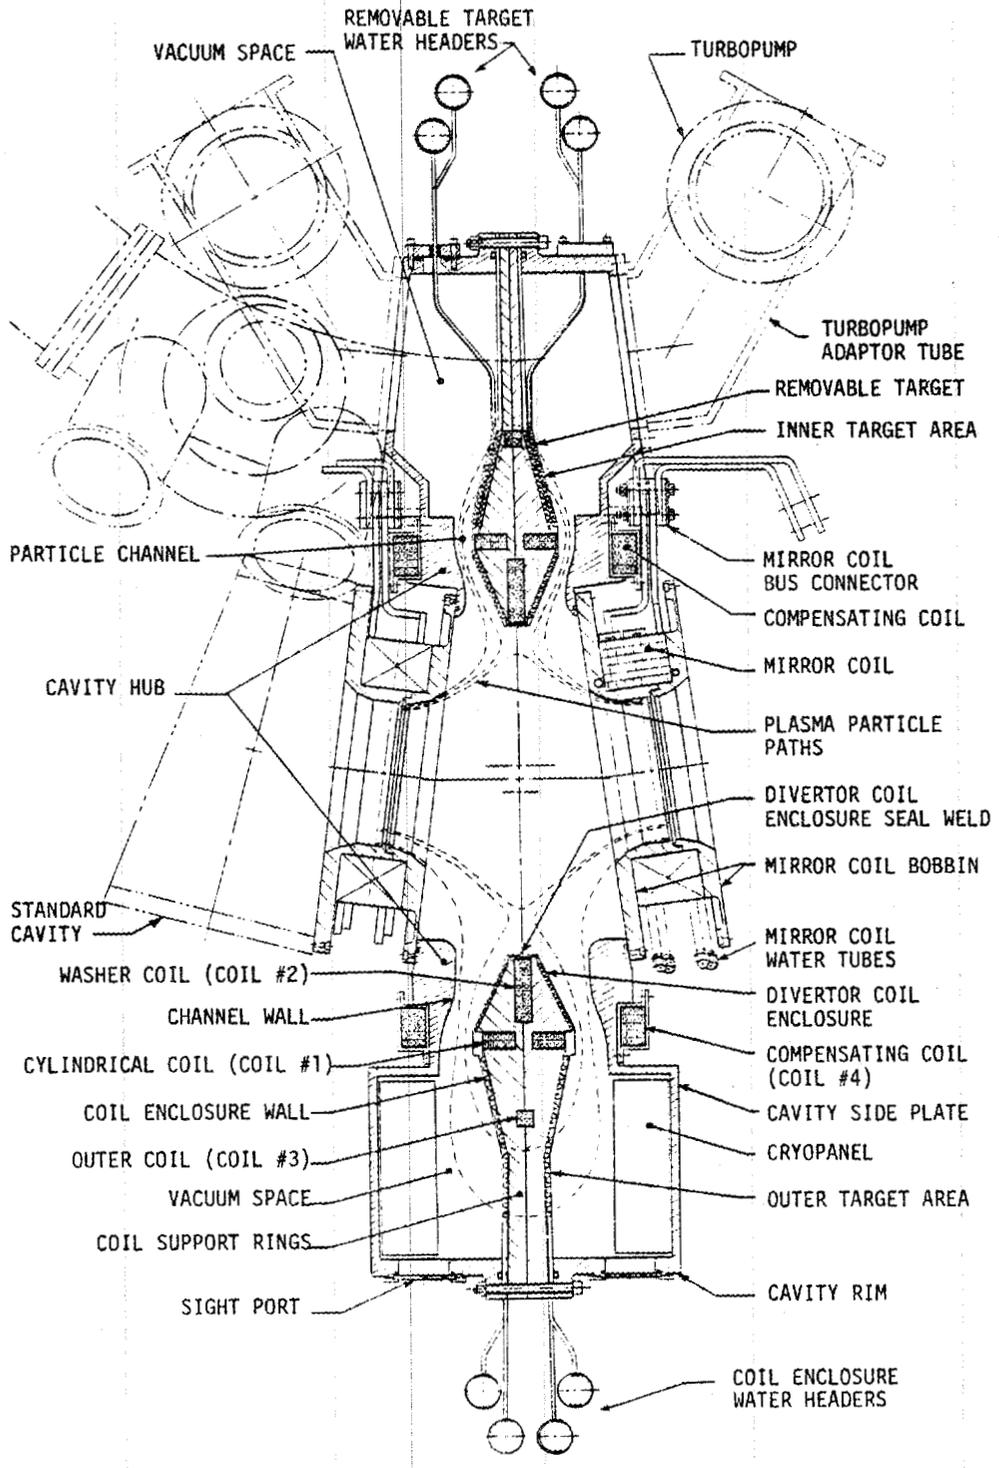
Horizontal Cross Section Through the Toroidal Divertor Assembly
